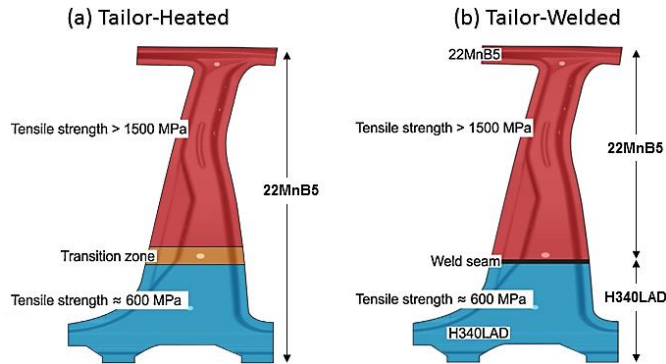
Schematic of a B-pillar made by (a) Tailor heated, and (b) Tailor welded hot stamping methods [20].
